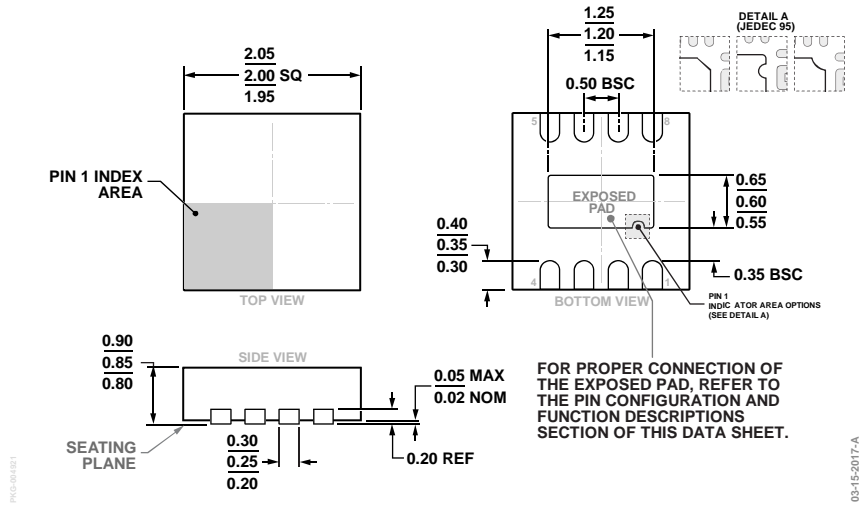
8-Lead Lead Frame Chip Scale Package [LFCSP]
